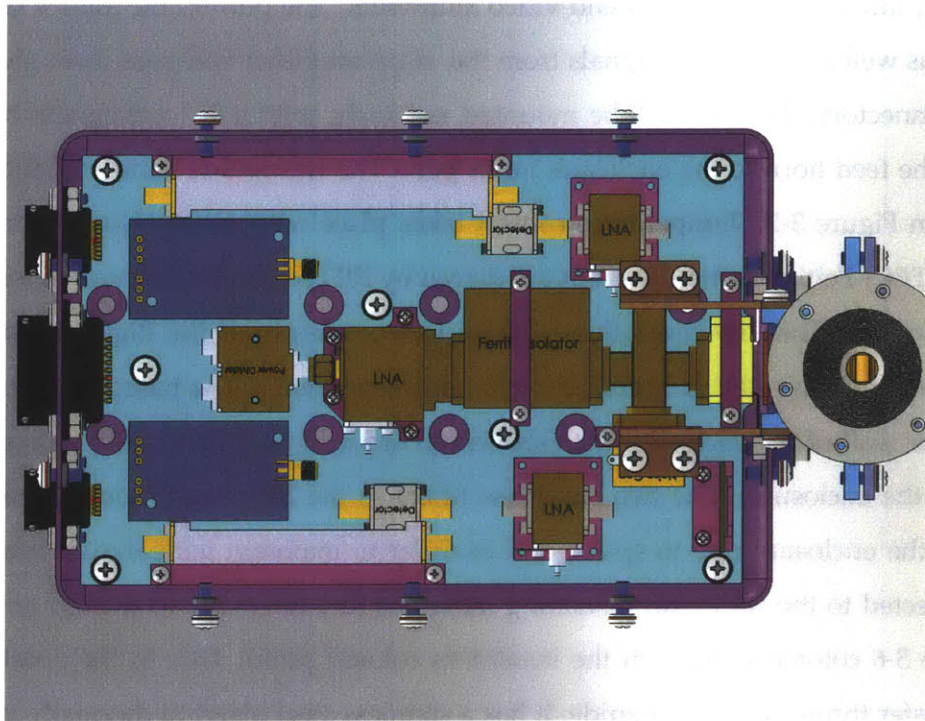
Radiometer front-end enclosure, top view. The feed horn is located on the right side of the drawing, and the barrel connectors are on the left.[6]
